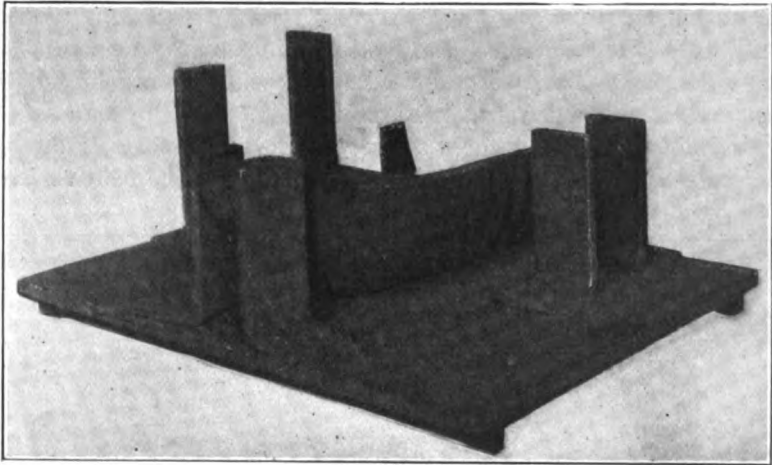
FIRST SECTION OF CORE PLACED IN PASTING JIG
